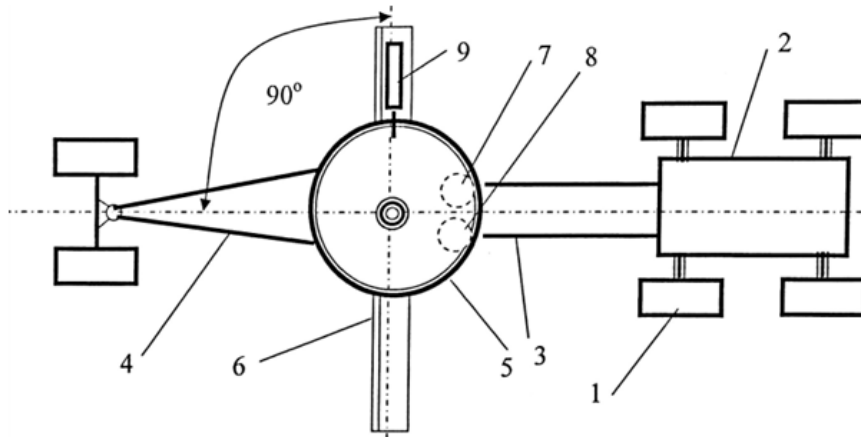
Fastening scheme of the working equipment of the auto grader:
